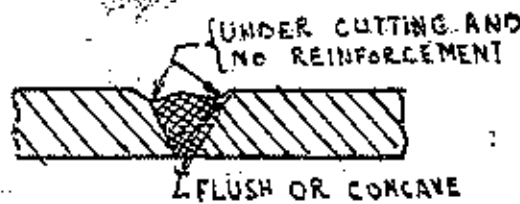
(b) DEFECTIVE BUTT WELD.
